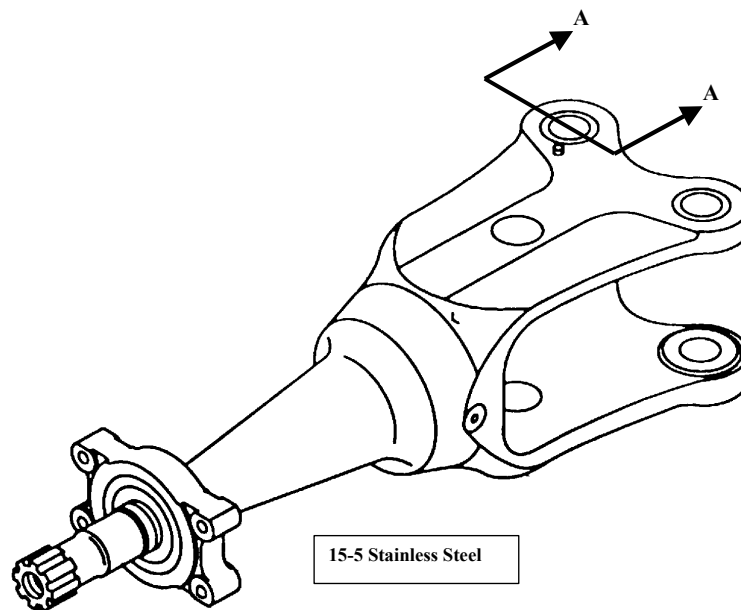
MAIN ROTOR SPINDLE GEOMETRY
